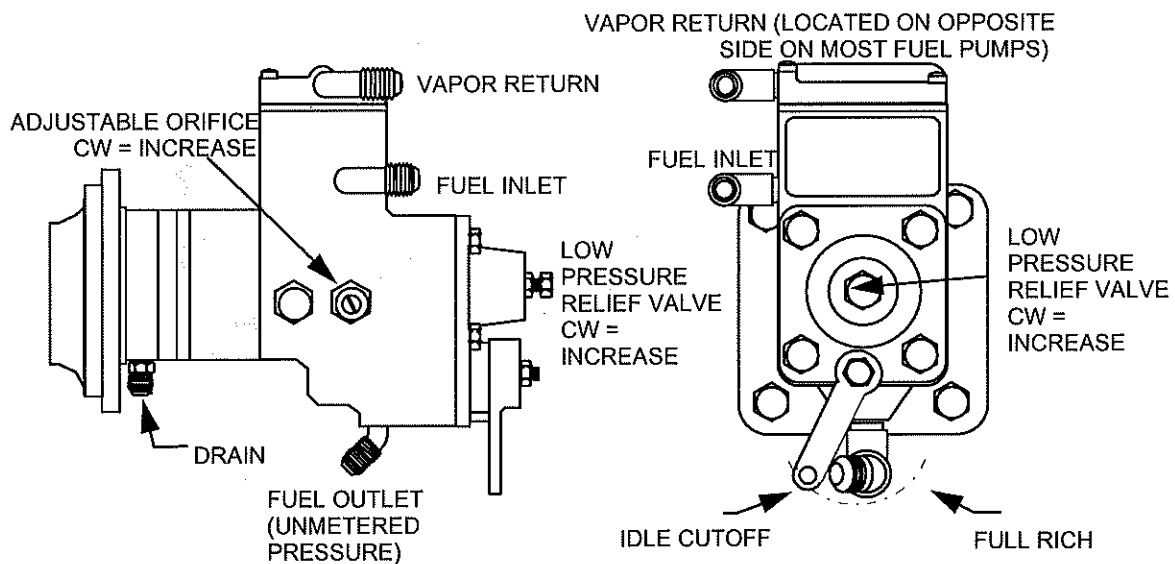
NATURALLY ASPIRATED ENGINE (MIXTURE CONTROL EQUIPPED) FUEL PUMP
